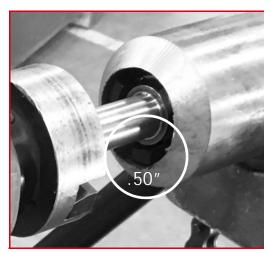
BG22 BOILER GUN INSTALLED IN WORKPIECE
